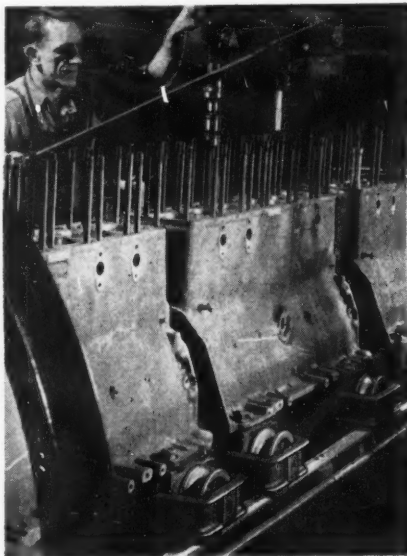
Note "Ears" Cast on Side of Crankcase to Which Conveyor Wheel Housings can be Bolted
